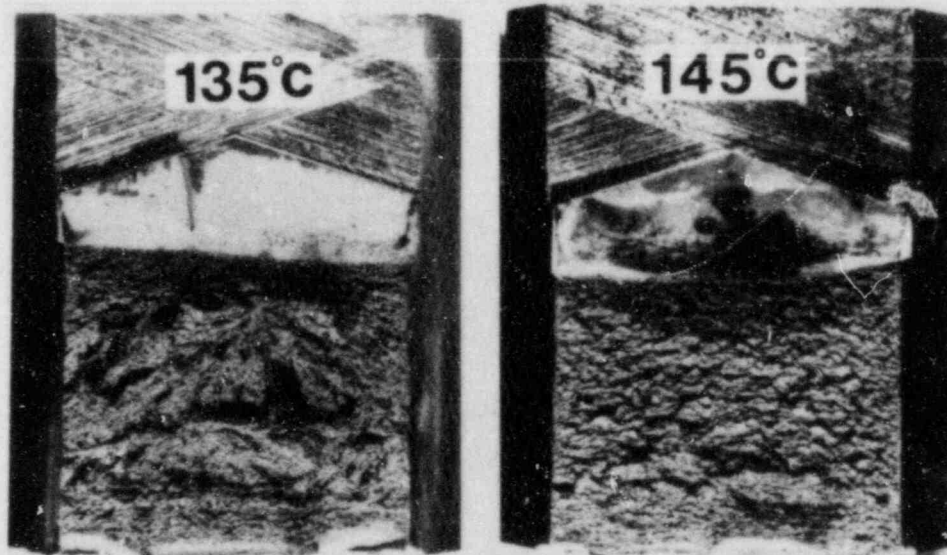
Fracture surfaces of two specimens of A508 steel (60 mm thick) fractured with spring-in-series at indicated temperature. Rapid fibrous crack extension at 145°C did not induce cleavage.
